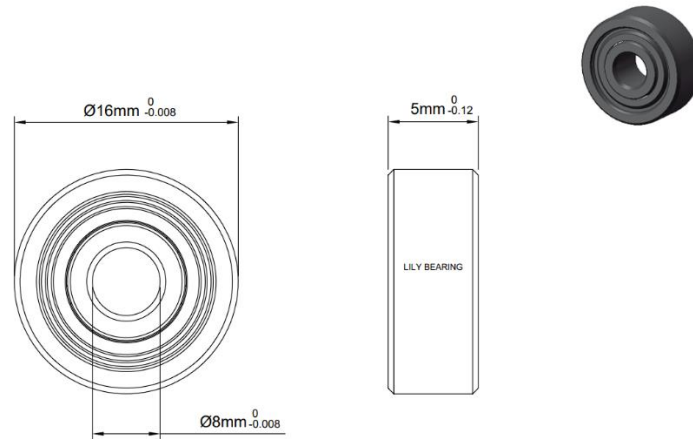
Dimensions of the 688zz axial bearing by the manufacturer Lily (LILY, n.d.-a)
